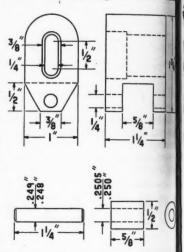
(Above) and 4 (Below)—Detail Doings of Parts for Form Tool Steadyrest
